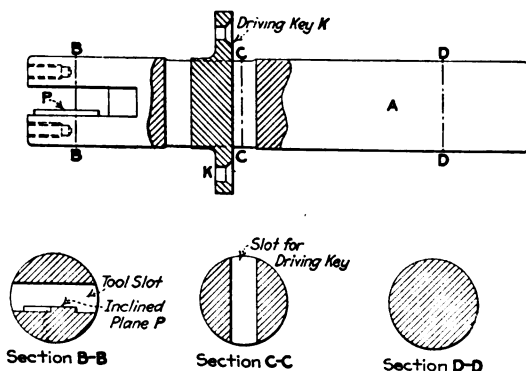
DETAILS OF HEAVY RECESSING TOOL
